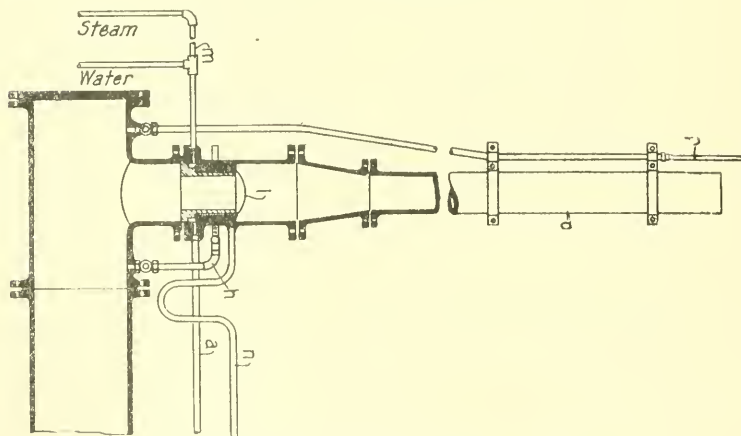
WEFER SAFETY VALVE FOR COKE OVEN GAS MAINS
